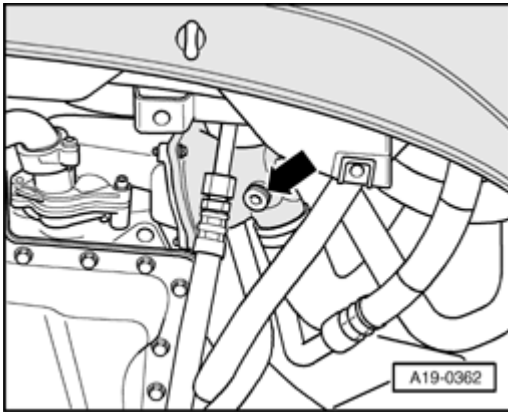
Removing/Installing Drain Plug On Coolant Thermostat Housing
